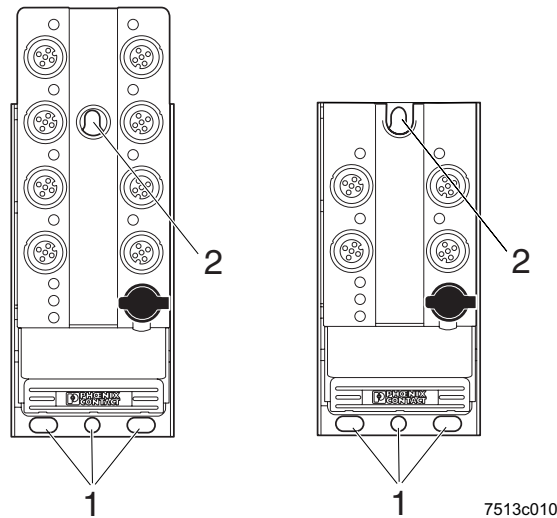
Front mounting of Fieldline Extension AS-i M12 device
